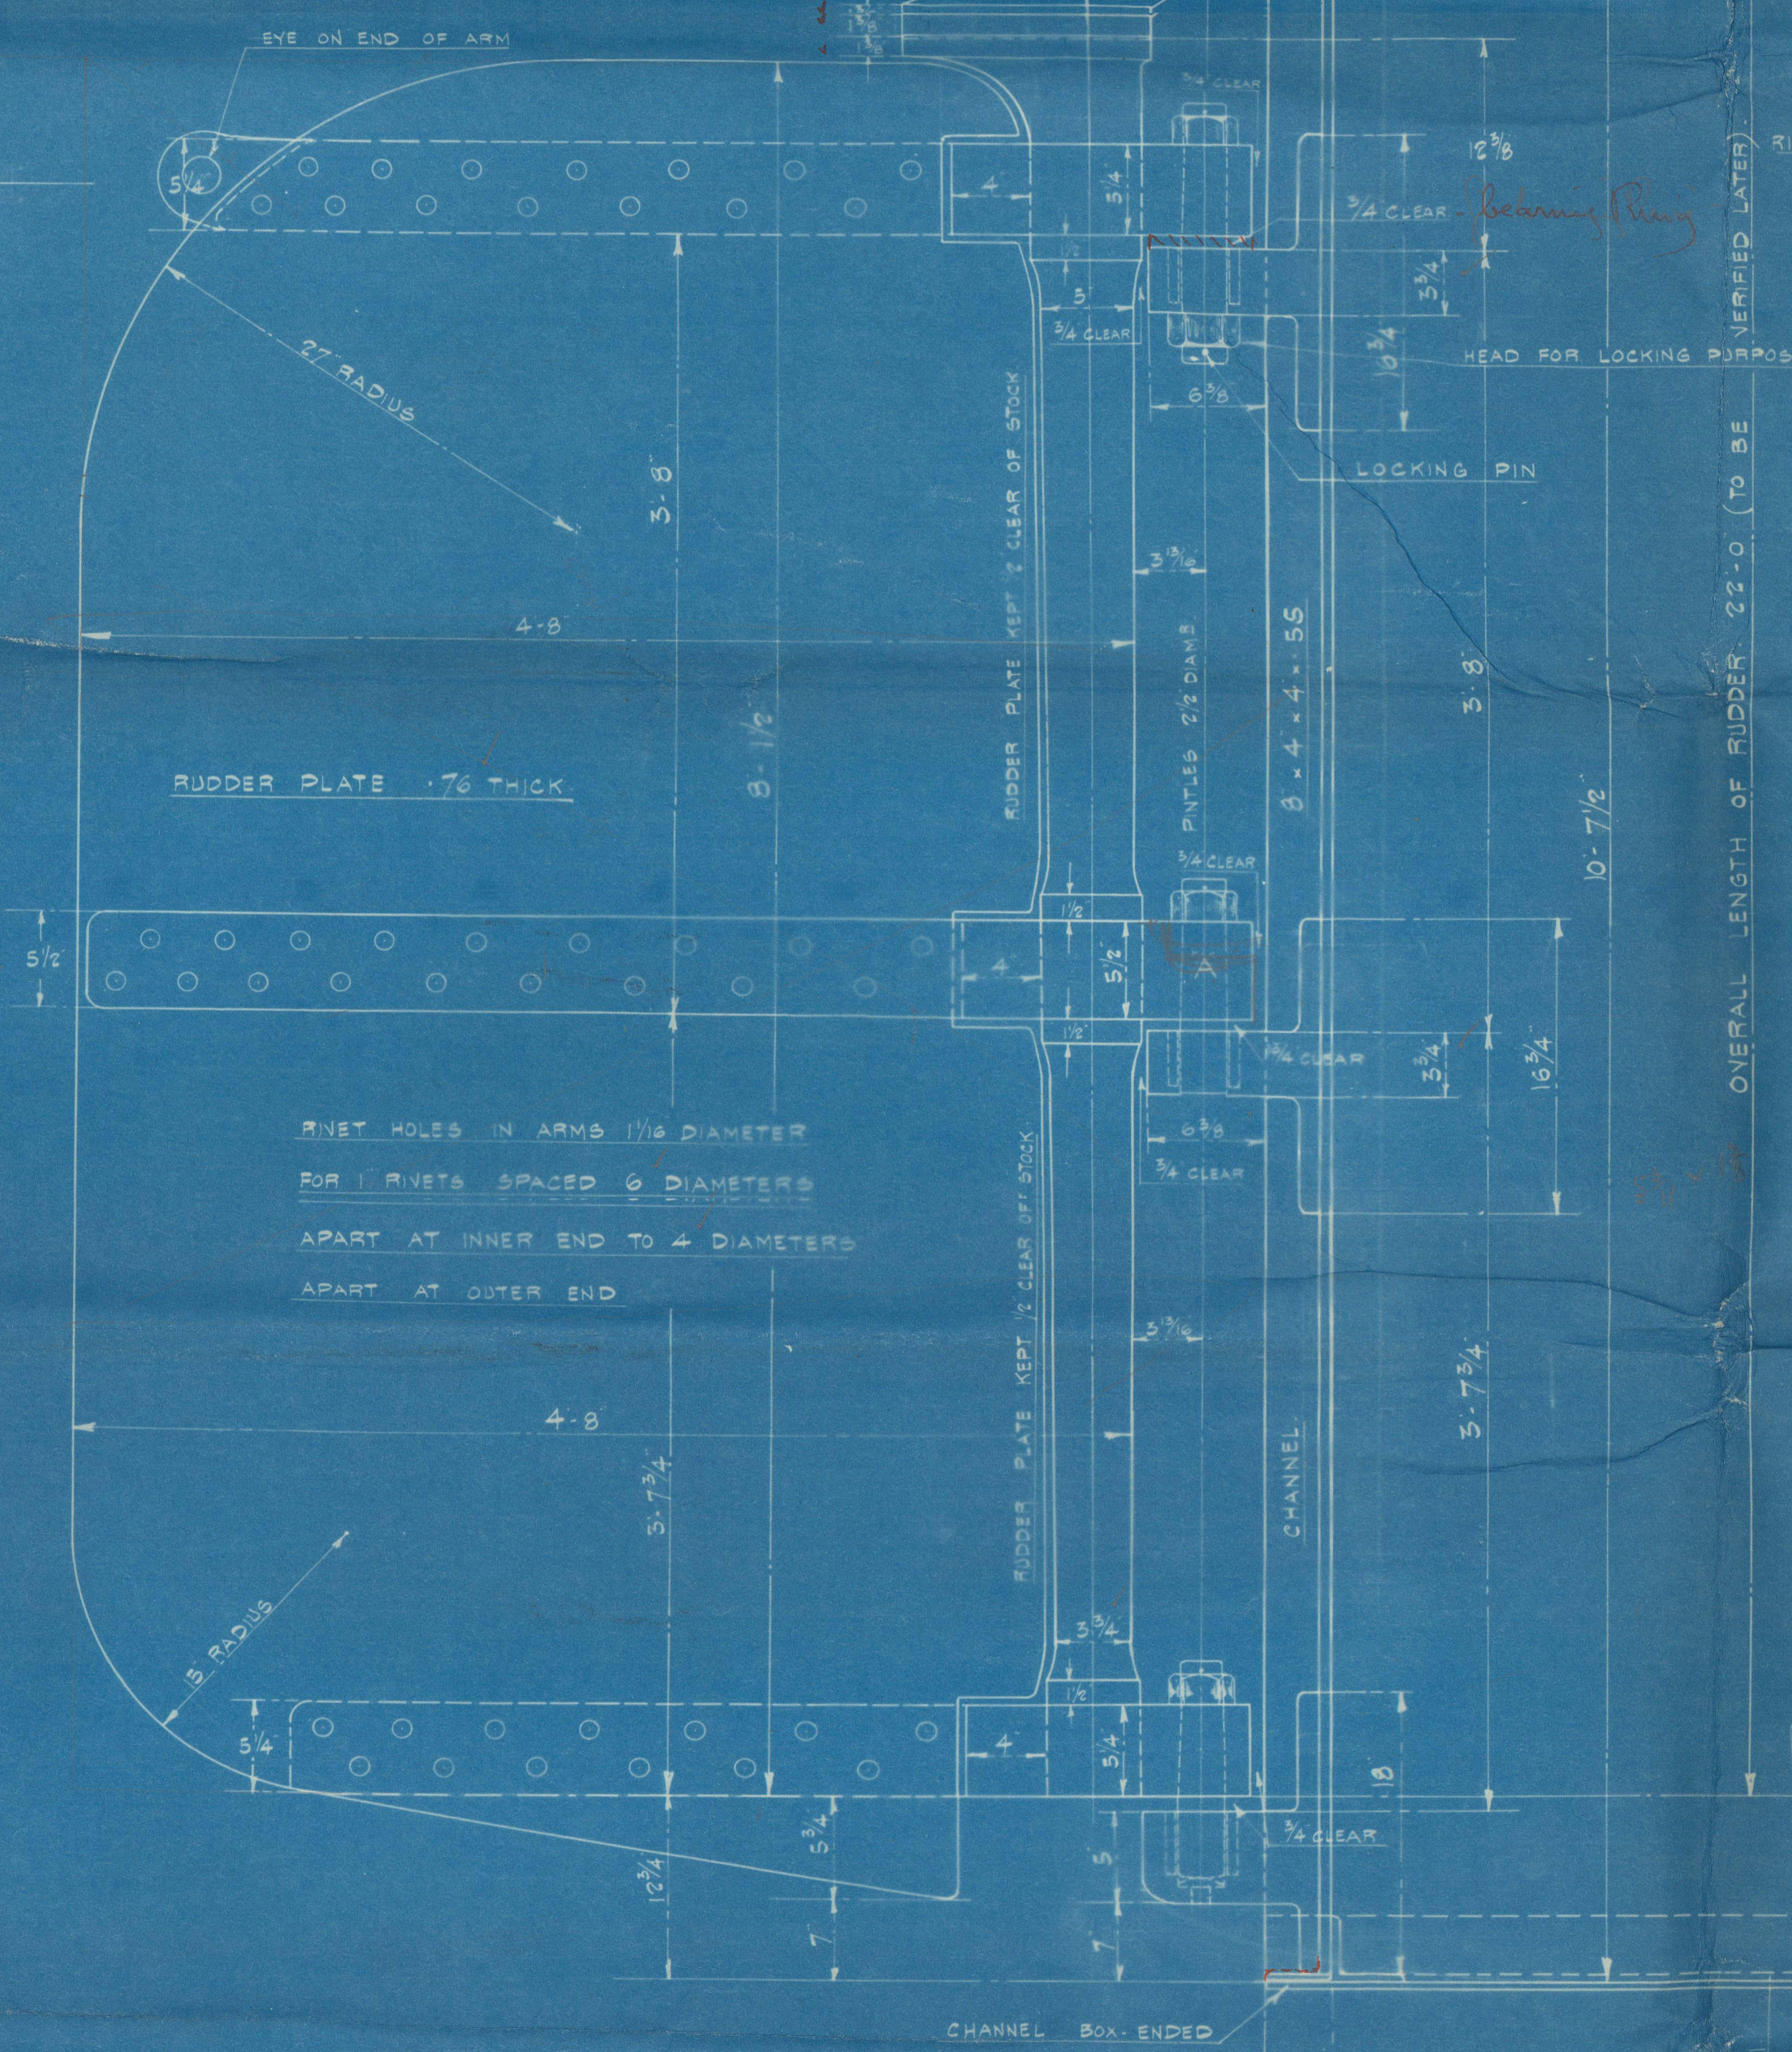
DETAIL SKETCH OF HEEL GUDGEON & PINTLE
